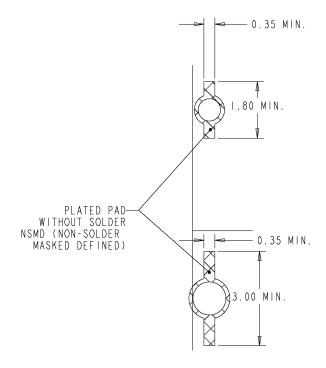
Plated pad for cage pin (Detail cage pin)
